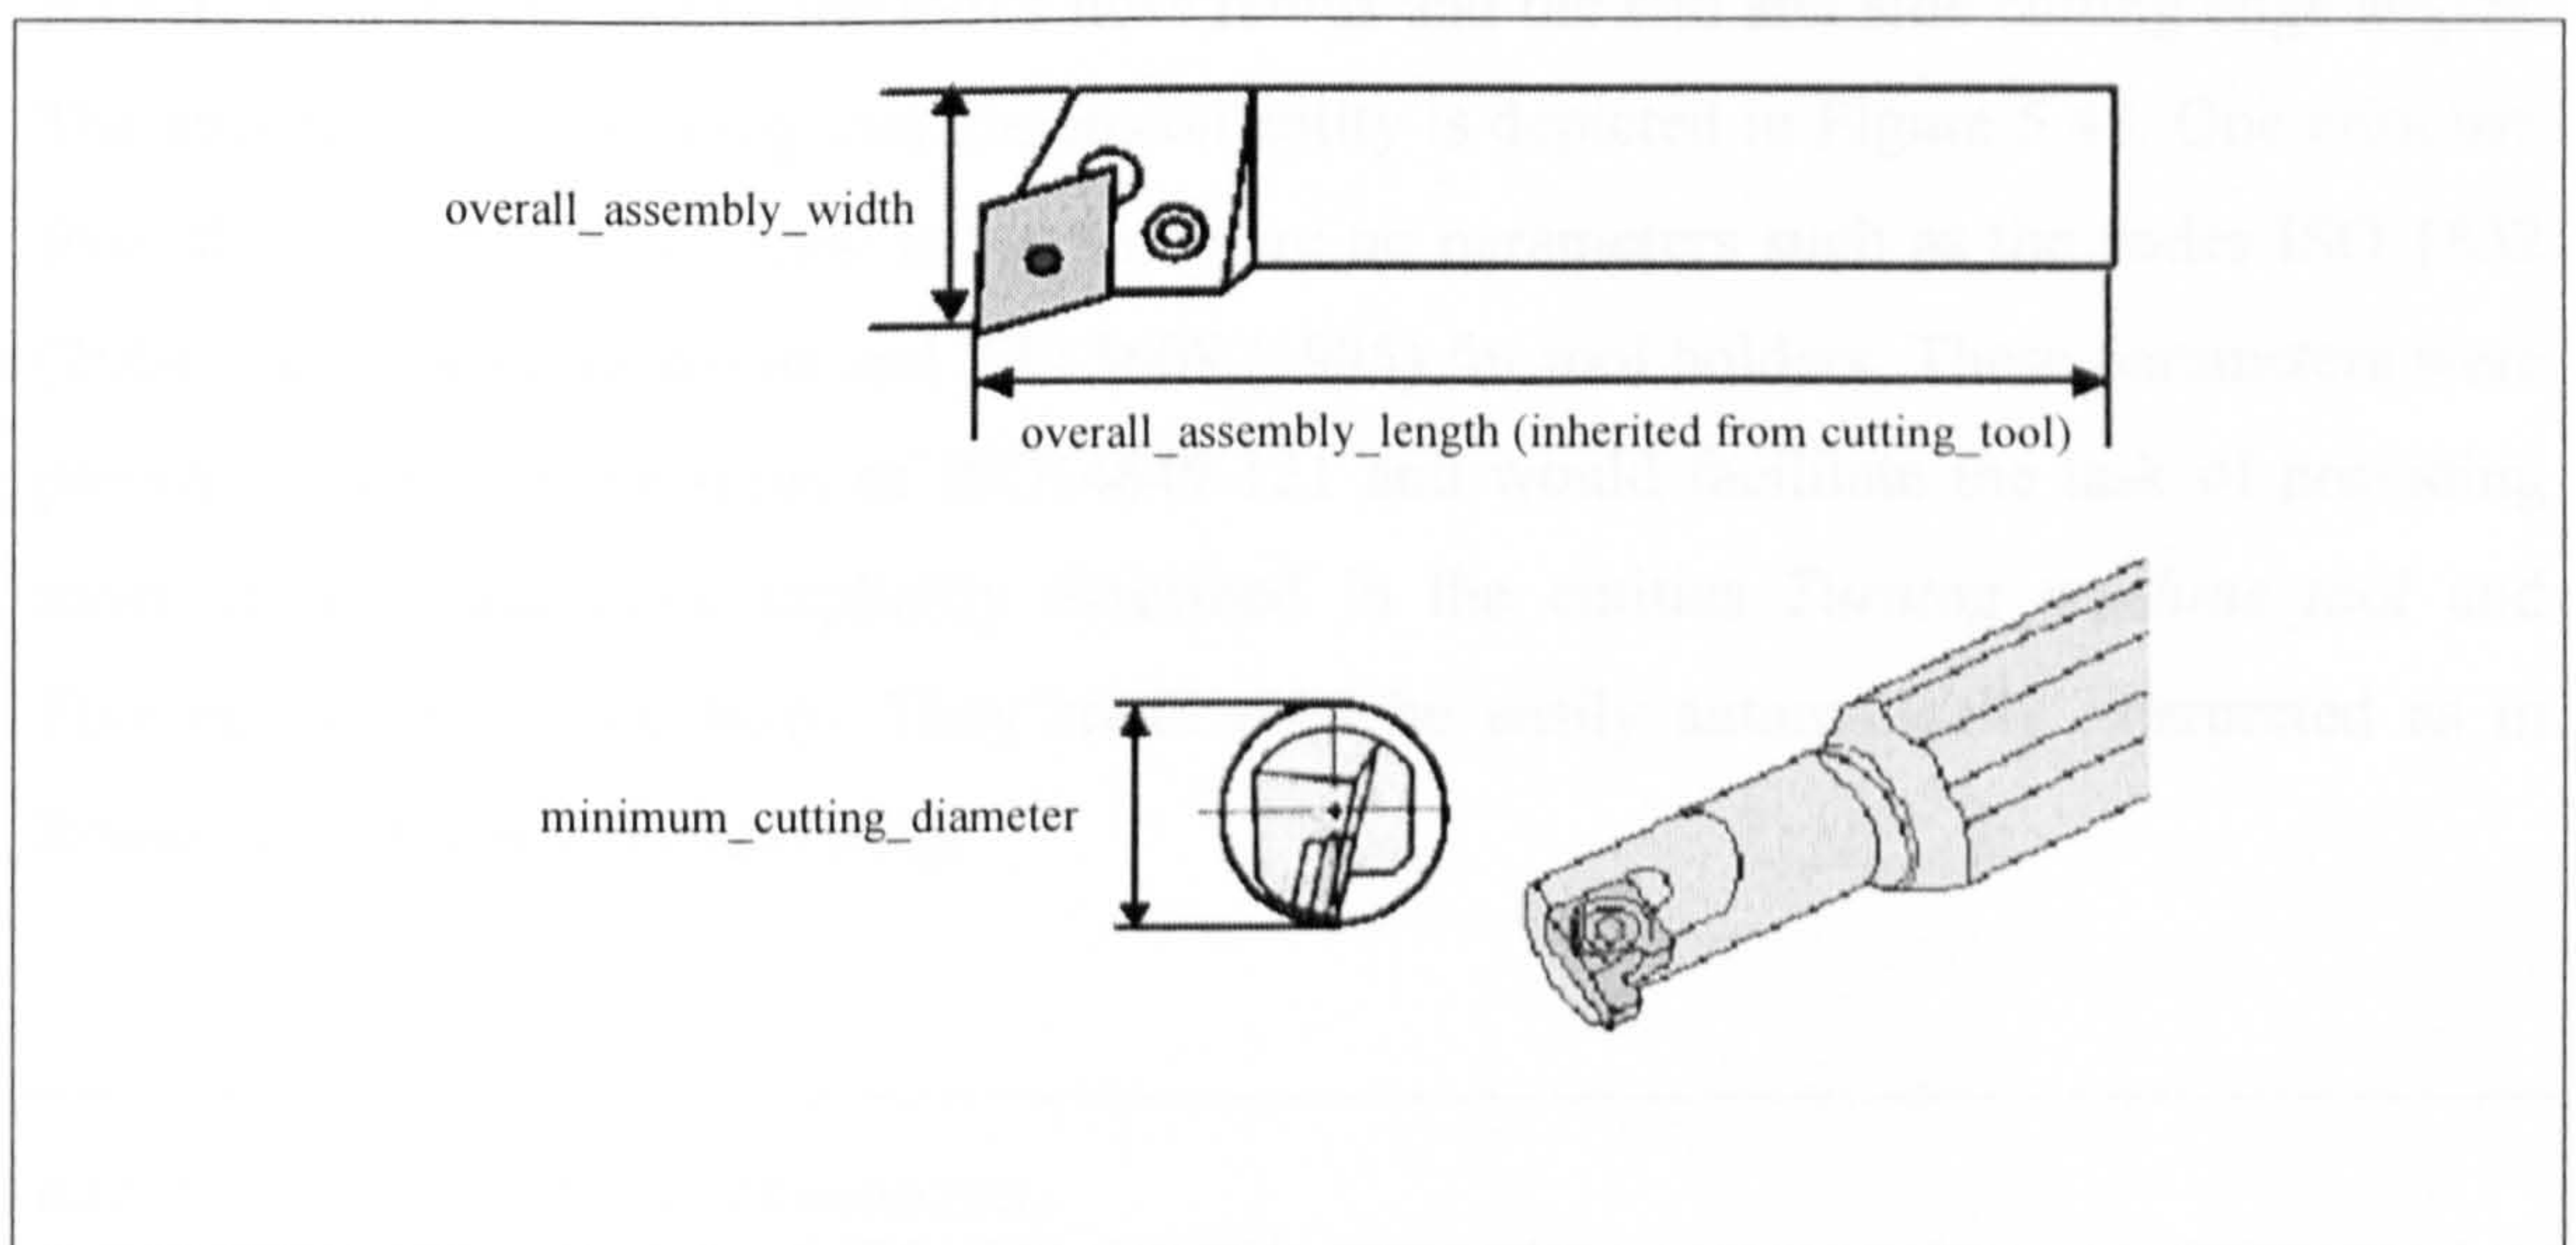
The cutting tool assembly measures and minimum cutting diameter(ISO14649-121 2003)
